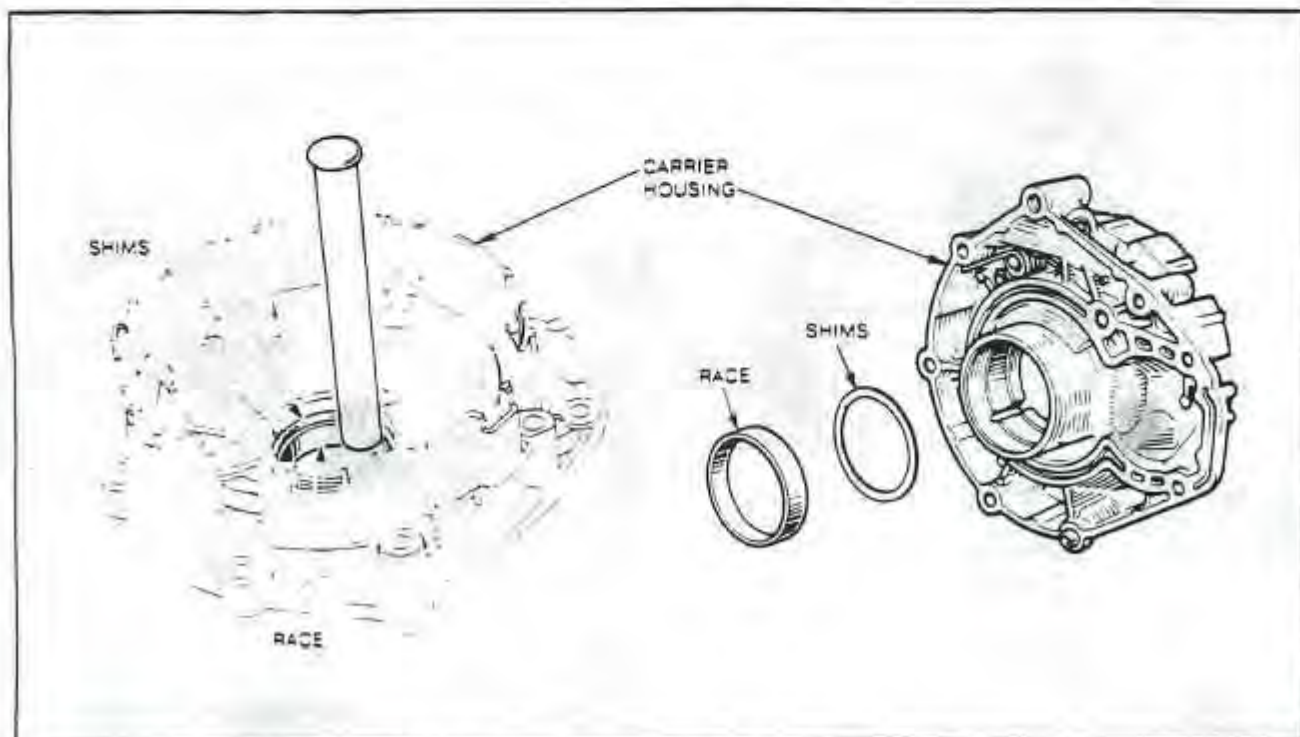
PLANETARY CARRIER CLEARANCE SHIMS
